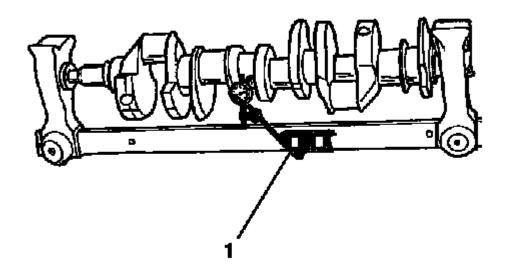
Measuring The Crankshaft Runout Courtesy of GENERAL MOTORS COMPANY
